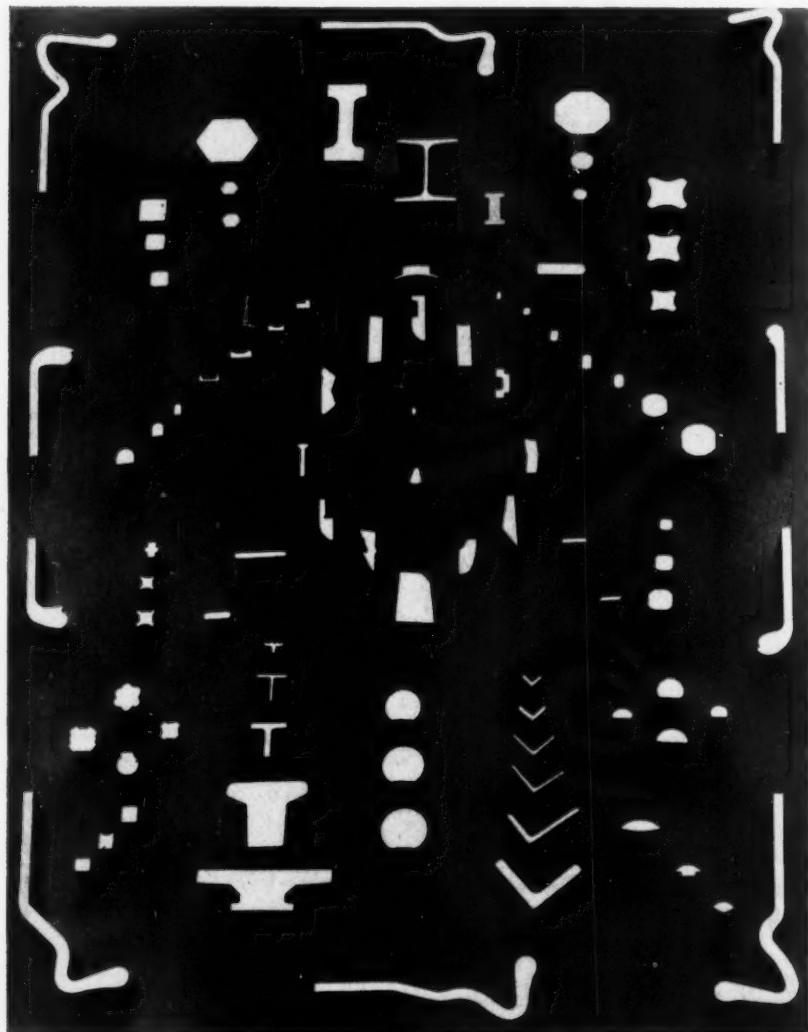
Above—A variety of typical cold-drawn steel cross sections
